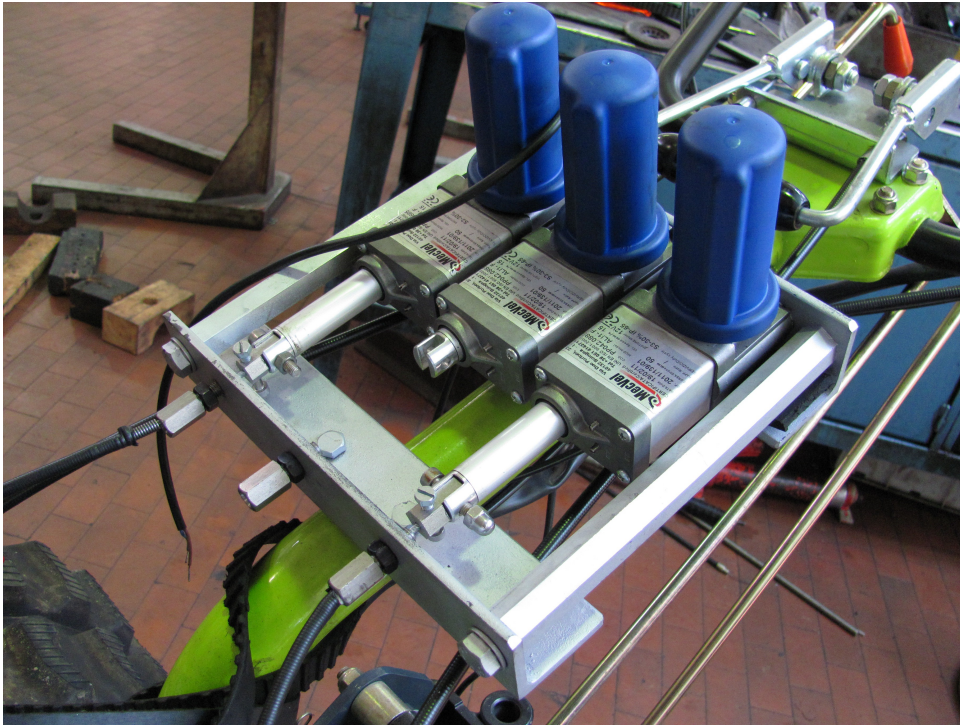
1: The Mecvel electric linear motors. From the left: the right brake, the clutch and the right brake motors.
